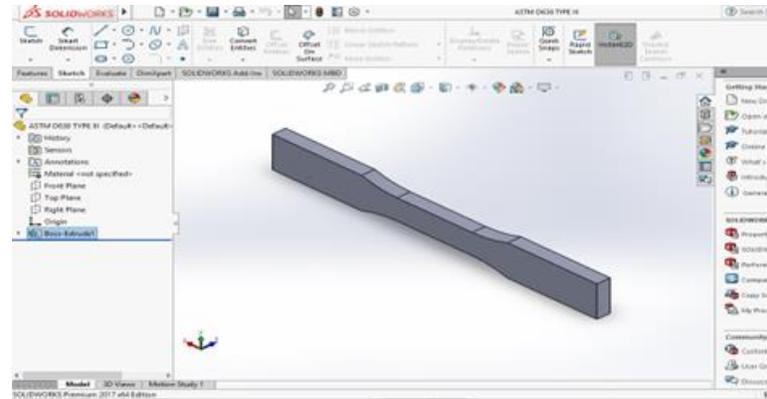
3D model of tensile specimen based on ASTM D638 standard.
